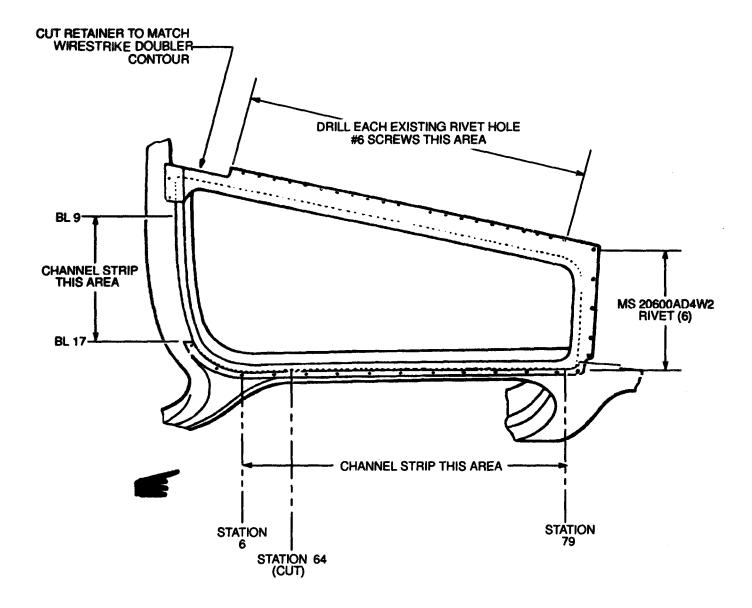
Door Frame/Windshield Frame Assembly Repair (Sheet 4).
